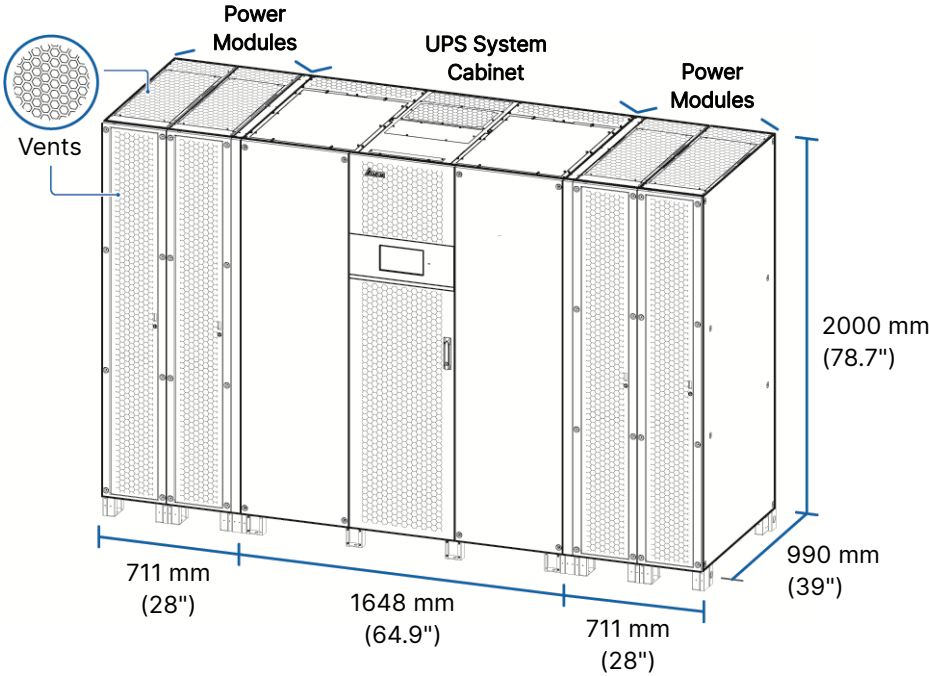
1000kVA UPS_ Exterior & Dimensions
